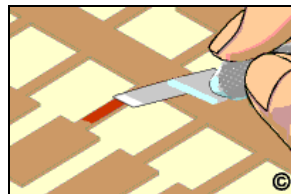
Scrape off the bonding film from solder joint area on the back side.
